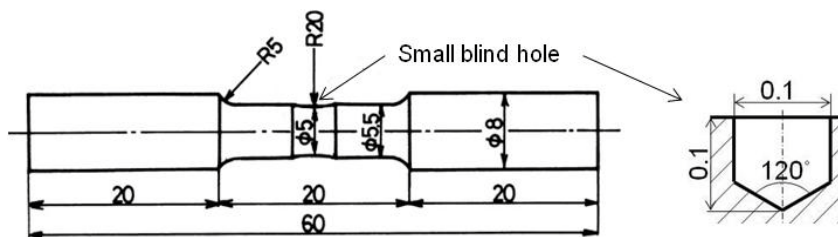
Dimensions of the fatigue smooth specimen and details of small blind hole (in mm).
